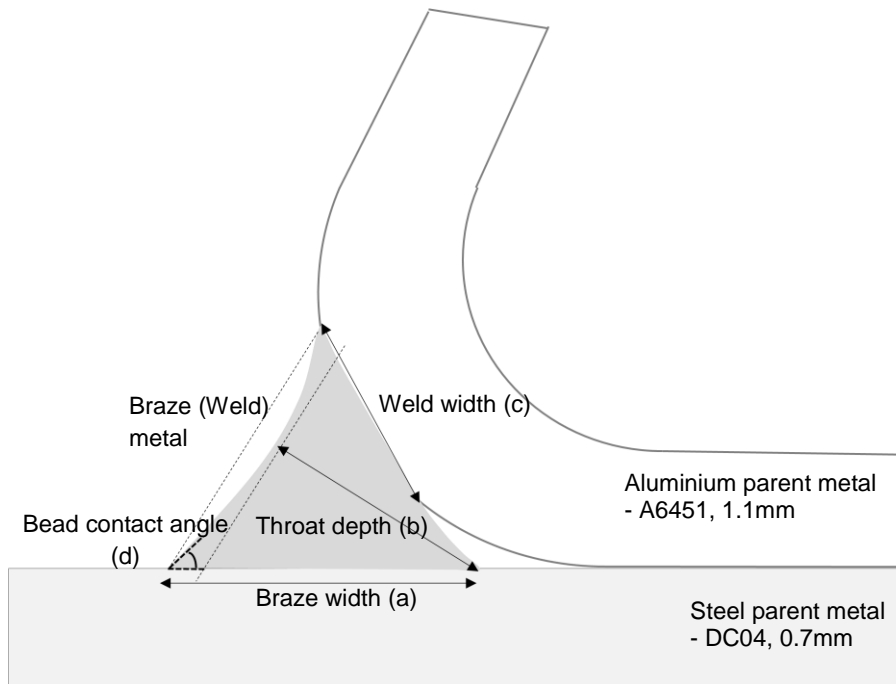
Schematic of a cross section of the flare bevel groove joint with the critical dimensions
